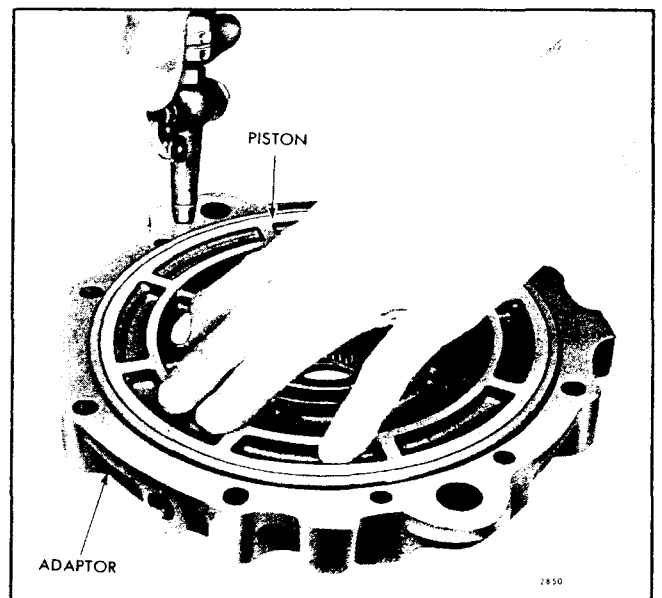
Removing Reverse Clutch Piston from Gear Housing Adaptor
